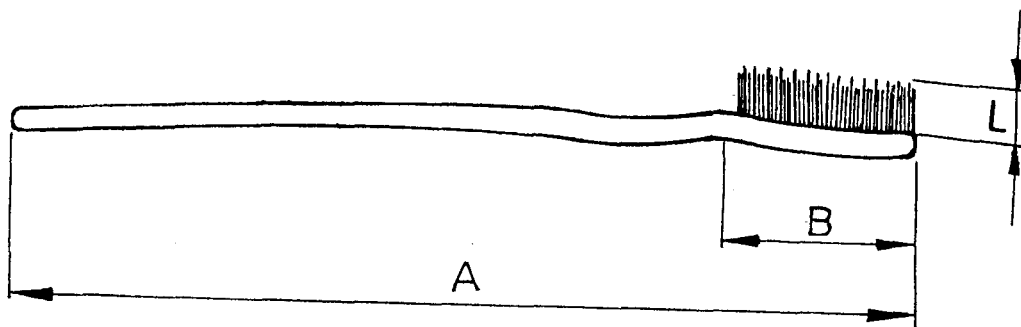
BRUSH HANDLE WITH BRUSH HEAD
